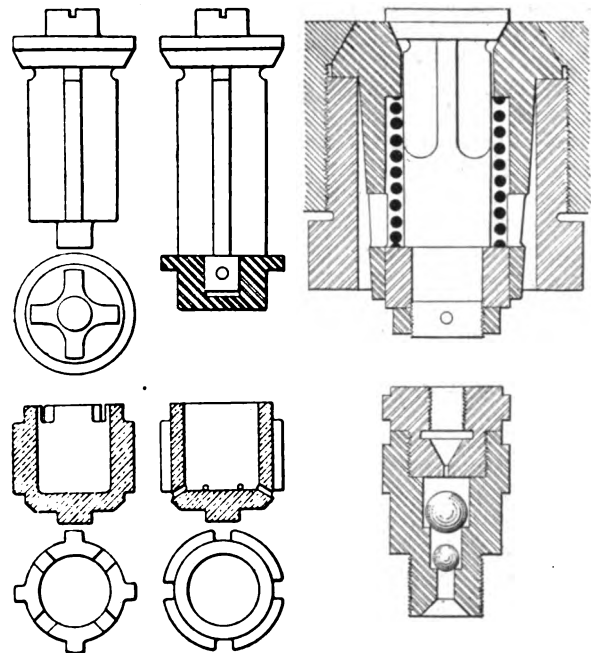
Types of poppet, cylindrical and ball check-valves used in internal-combustion engines
